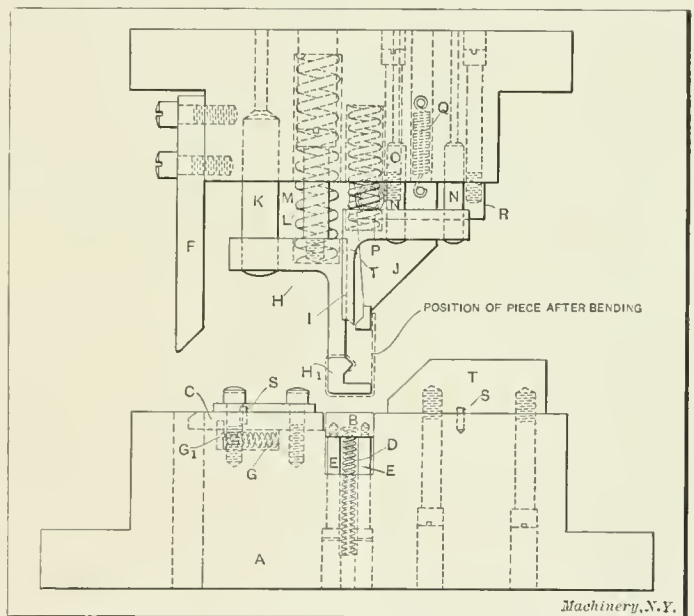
Elevation of Punch and Die for Making the Five Bends in the Piece shown at *D* in Fig. 1
